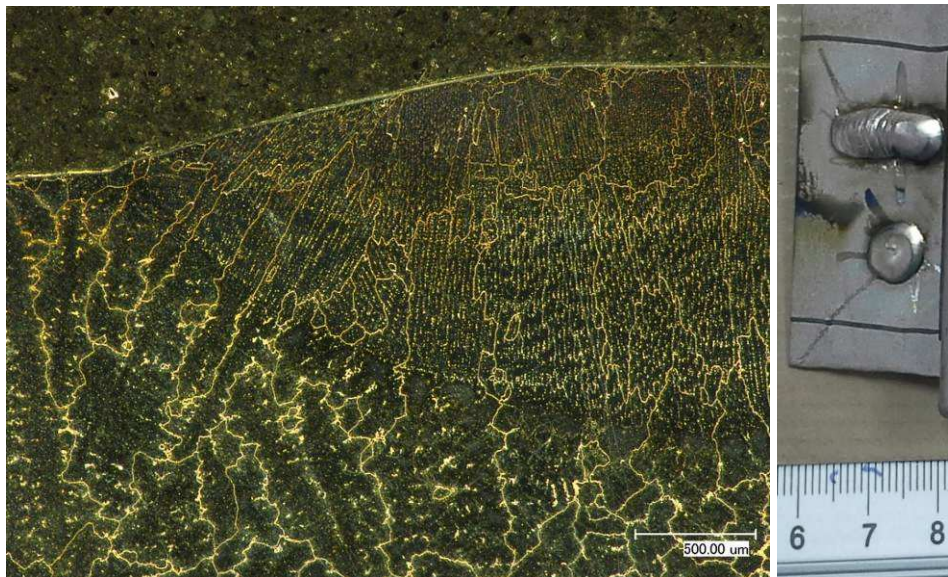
Example of plug and slot welds on wedge samples geometry
